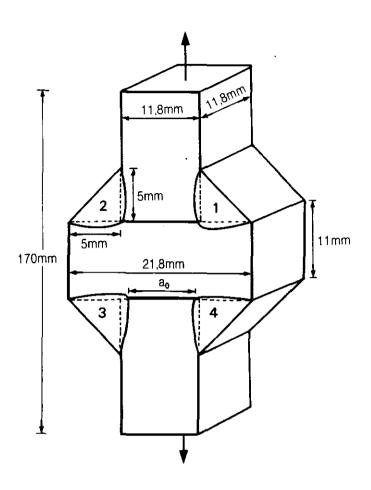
FLNFT test specimen design. a is the artificial throughthickness crack length. The sequence of welding of the single bead fillet welds is also indicated.
